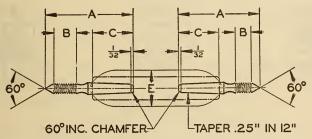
Thread plug gages, No. 0 to No. 6 sizes, inclusive
